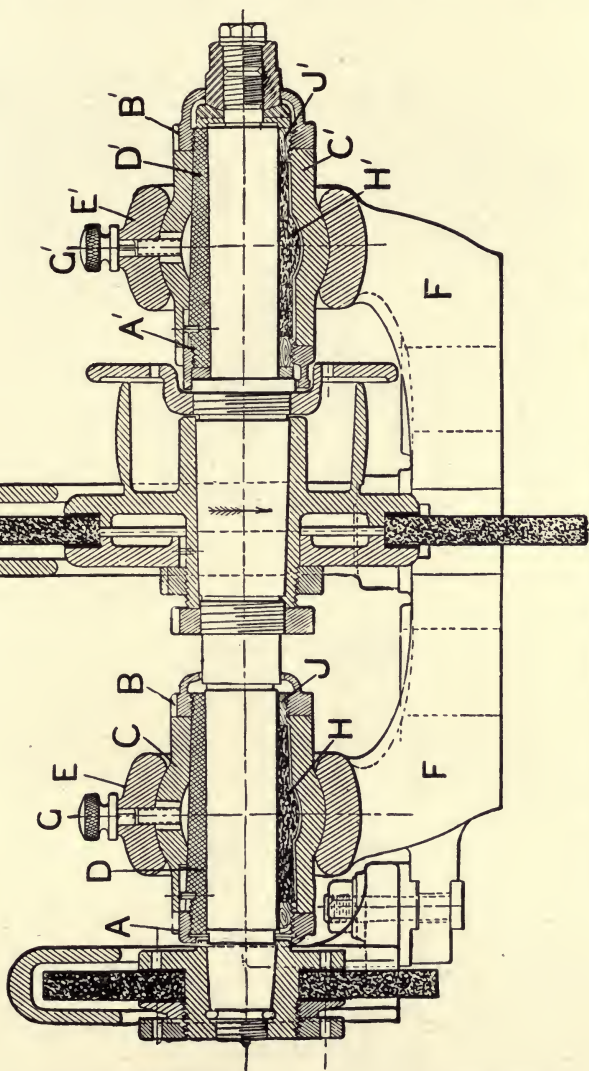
BROWN & SHARPE WHEEL SPINDLE (UNIVERSAL GRINDER)
